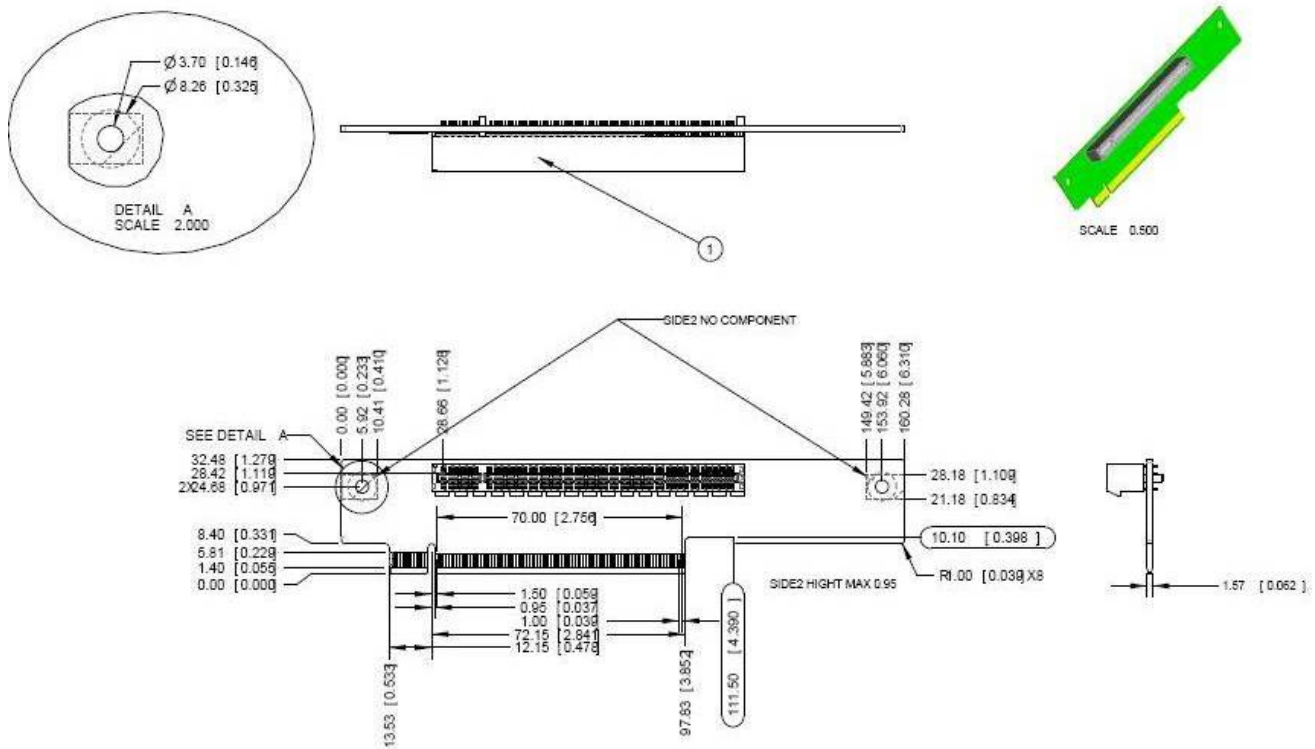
1U Full Height PCI Express* Riser Card Mechanical Drawing
